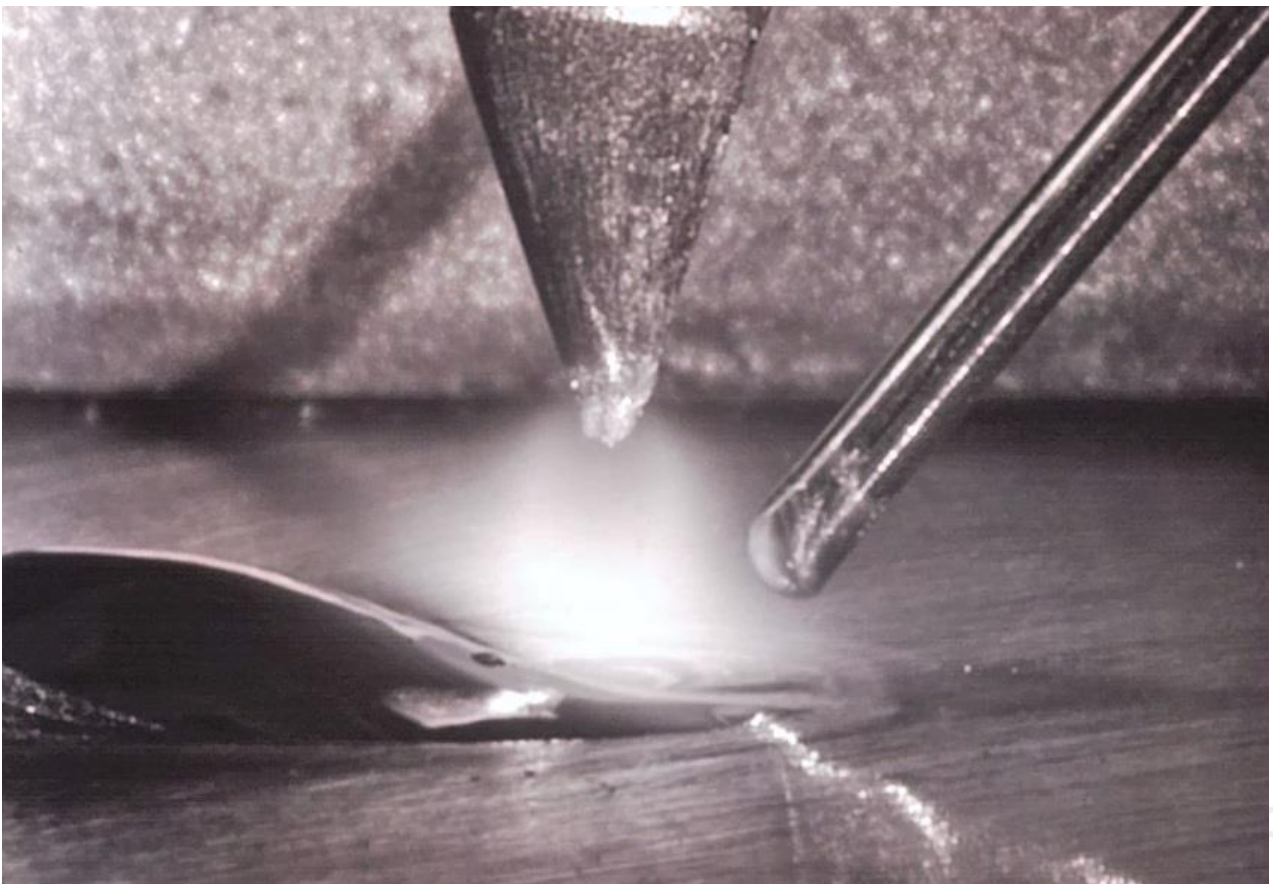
Dynamic Feed TIG Welding imaged at 1.000 fps
